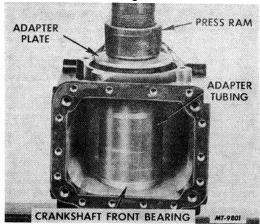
Pressing Crankshaft Front Bearing into Crankcase Recess
